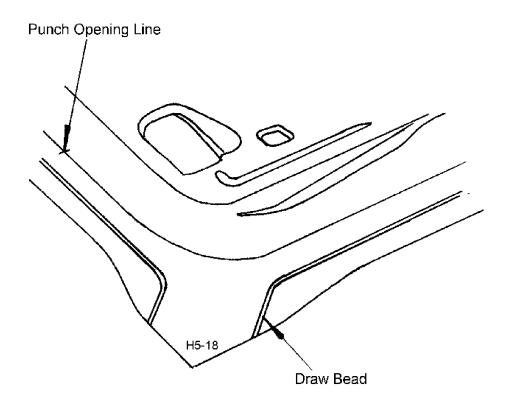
Typical Position of Drawbeads on a Door Inner Panel
